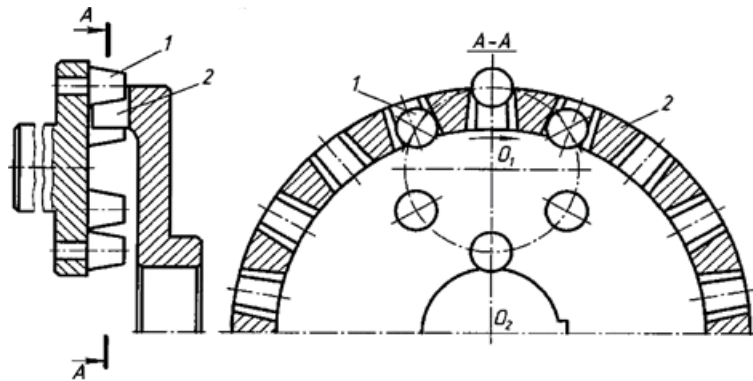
Nechaev end gear: 1 - gear, 2 - gear wheel
